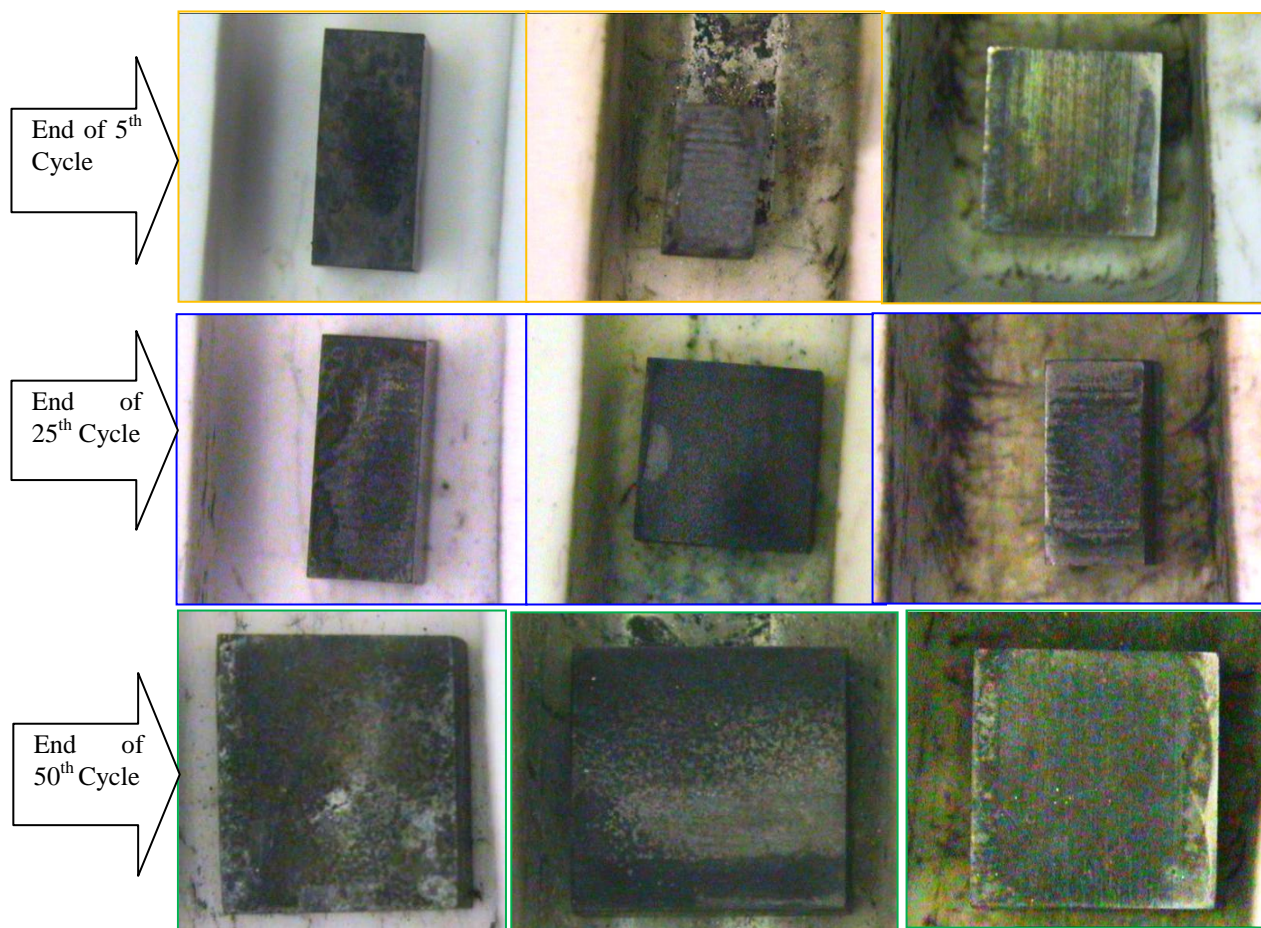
Hot Corroded zones of the Inconel 625 weldments
